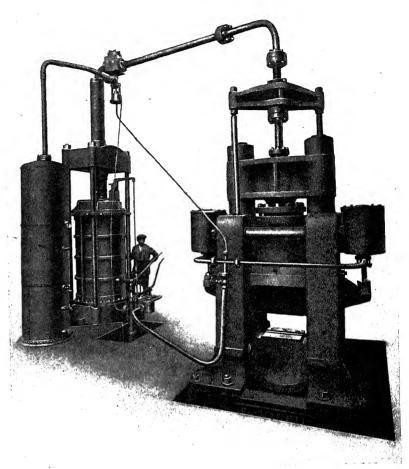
Steam-hydraulic Hot-bloom Shear
